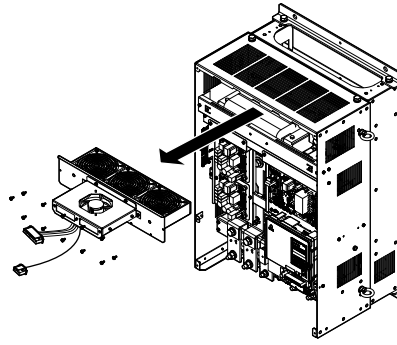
Remove the Fan Unit: 2A0169 to 2A0415, 4A0139 to 4A0362, and 5A0062 to 5A0242
